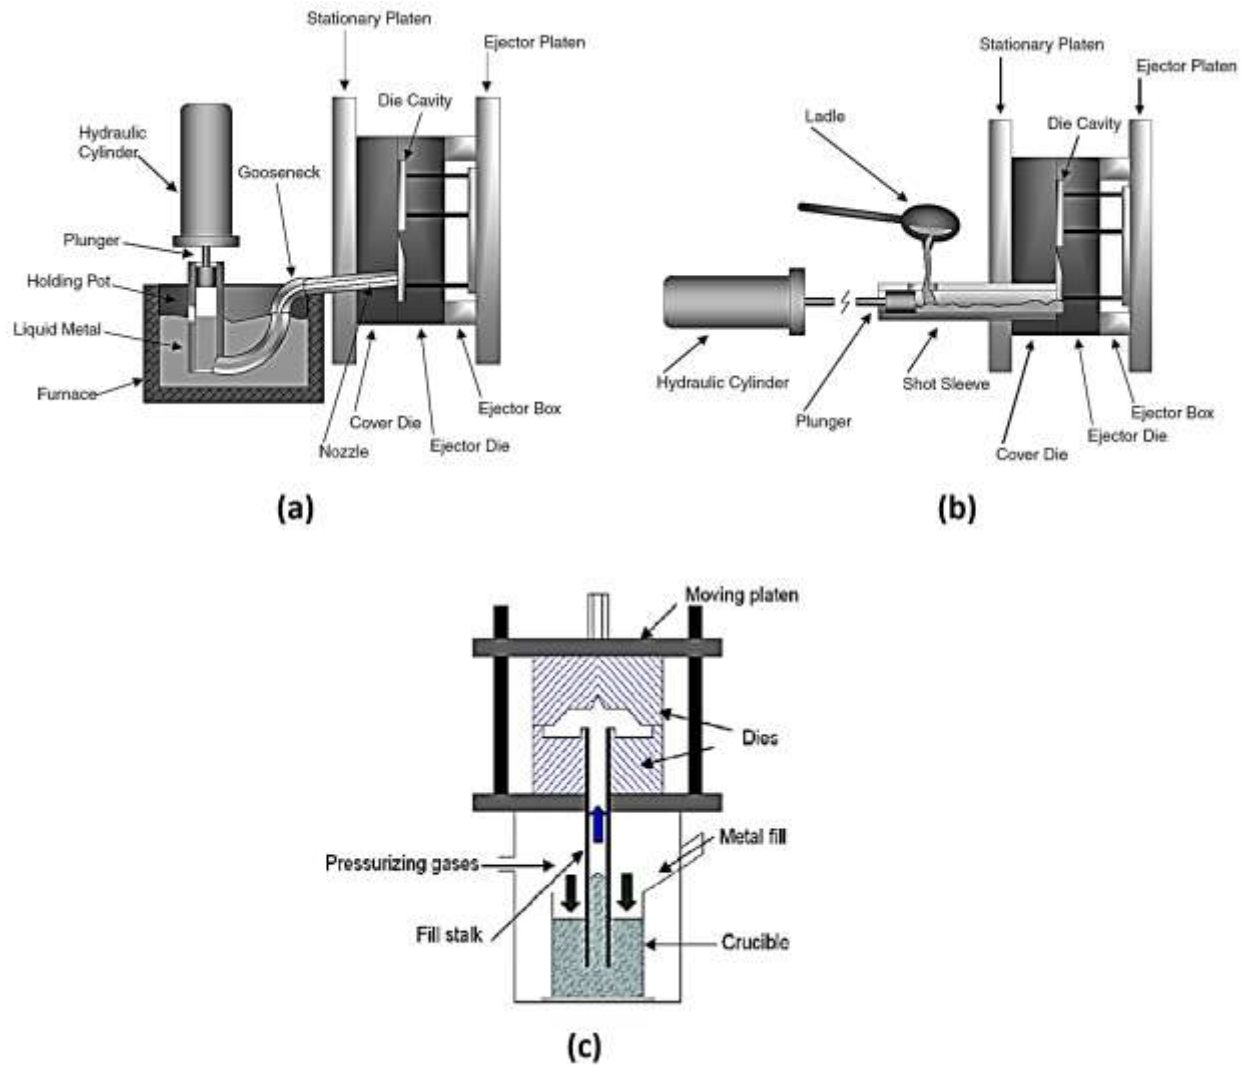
Schematic diagrams illustrating different types of casting methods; (a) hot chamber die casting (adapted from [185]); (b) cold chamber die casting (adapted from [185]); (c) low pressure casting (adapted from [179]). (2-column fitting image)
